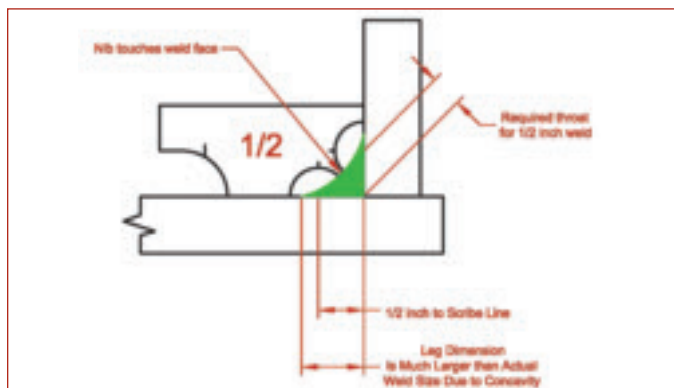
Concave fillet weld size is the same as the fillet weld gauge.
